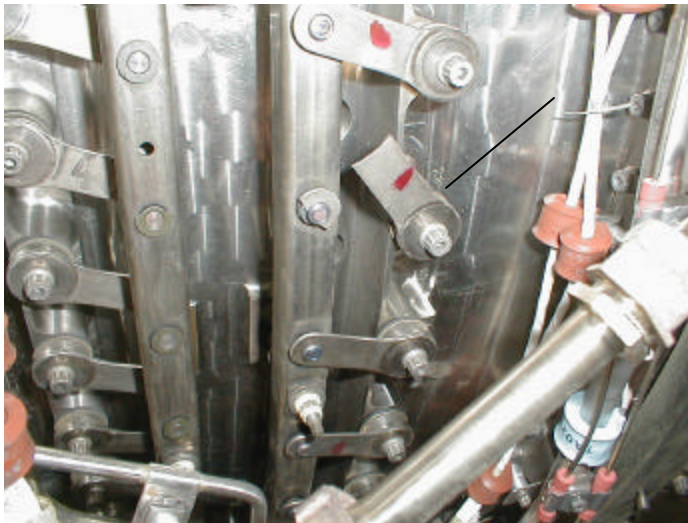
External view of the stage-one variable stator vane actuator ring and the single fractured lever (arrowed).
